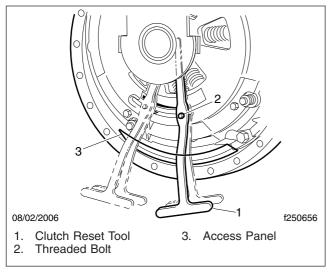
, Resetting the Clutch with the Clutch Reset Tool
